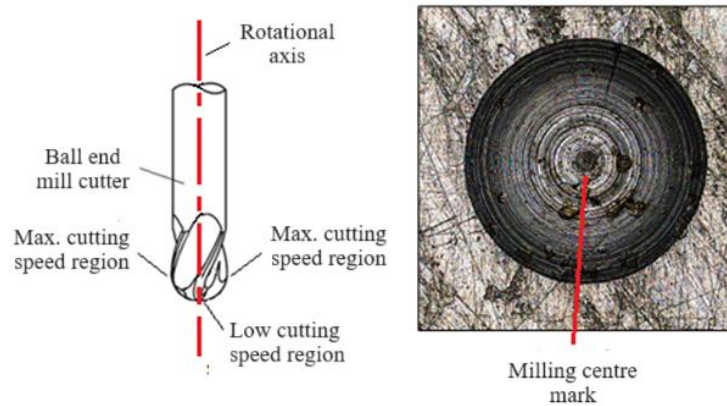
Illustration of cutting speed variation on end mill tool (left) and milling center mark (right) on the micro dimple surface
